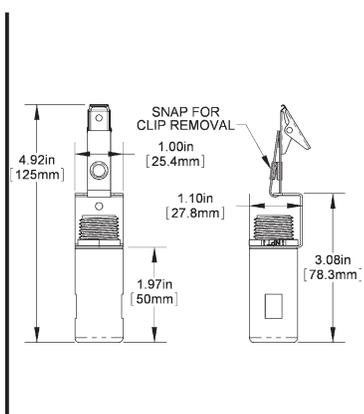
Hanging Bracket, 2" & 4" Buffer w/SS Threaded Fitting
